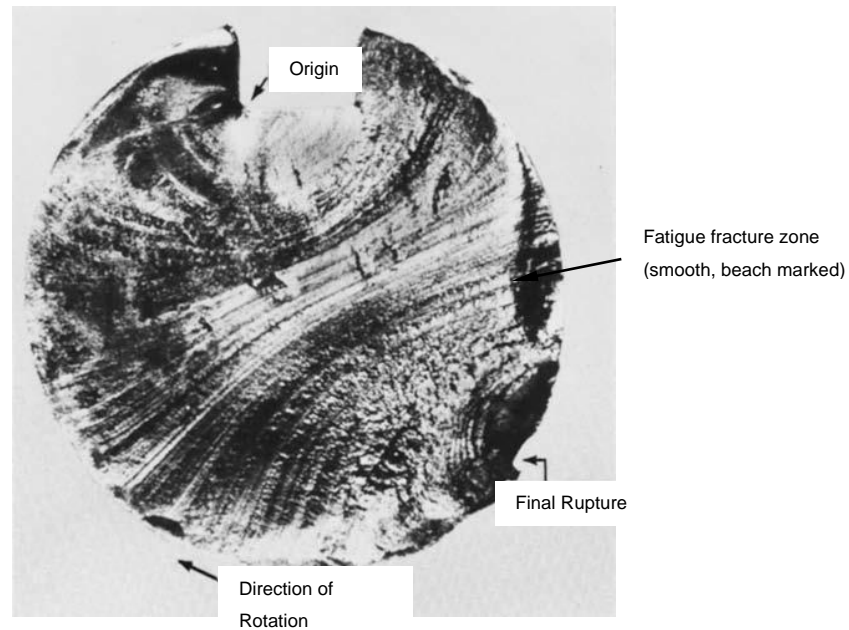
Fracture surface of a rotating steel shaft that experienced fatigue failure [43].
